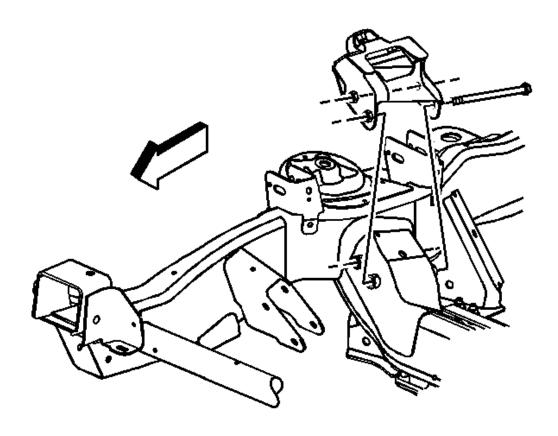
View Of Engine Mount Bracket & Bolts Courtesy of GENERAL MOTORS CORP.
